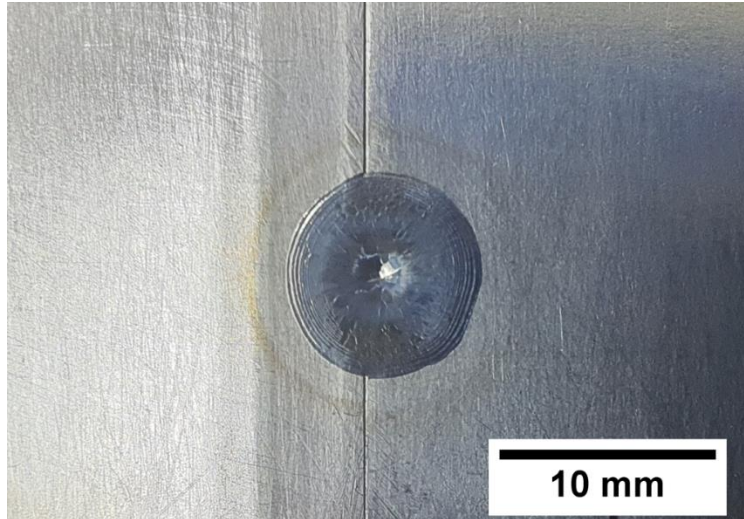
Weld spot created using argon as shielding gas
